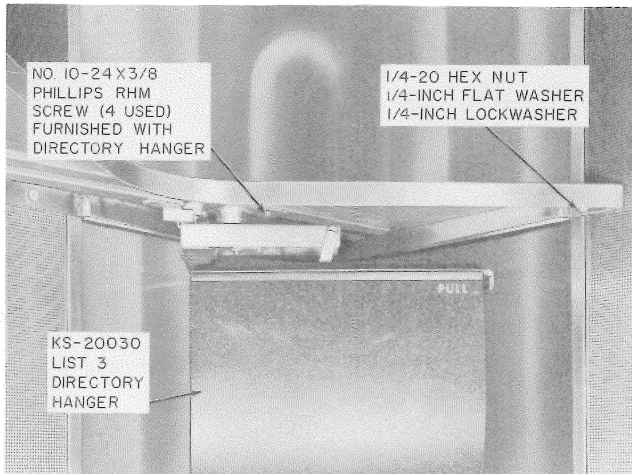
B-699052 Shelf Assembly with KS-20030, List 3 Directory Hanger
